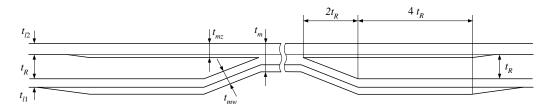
Connection of sandwich plating with massive plating
